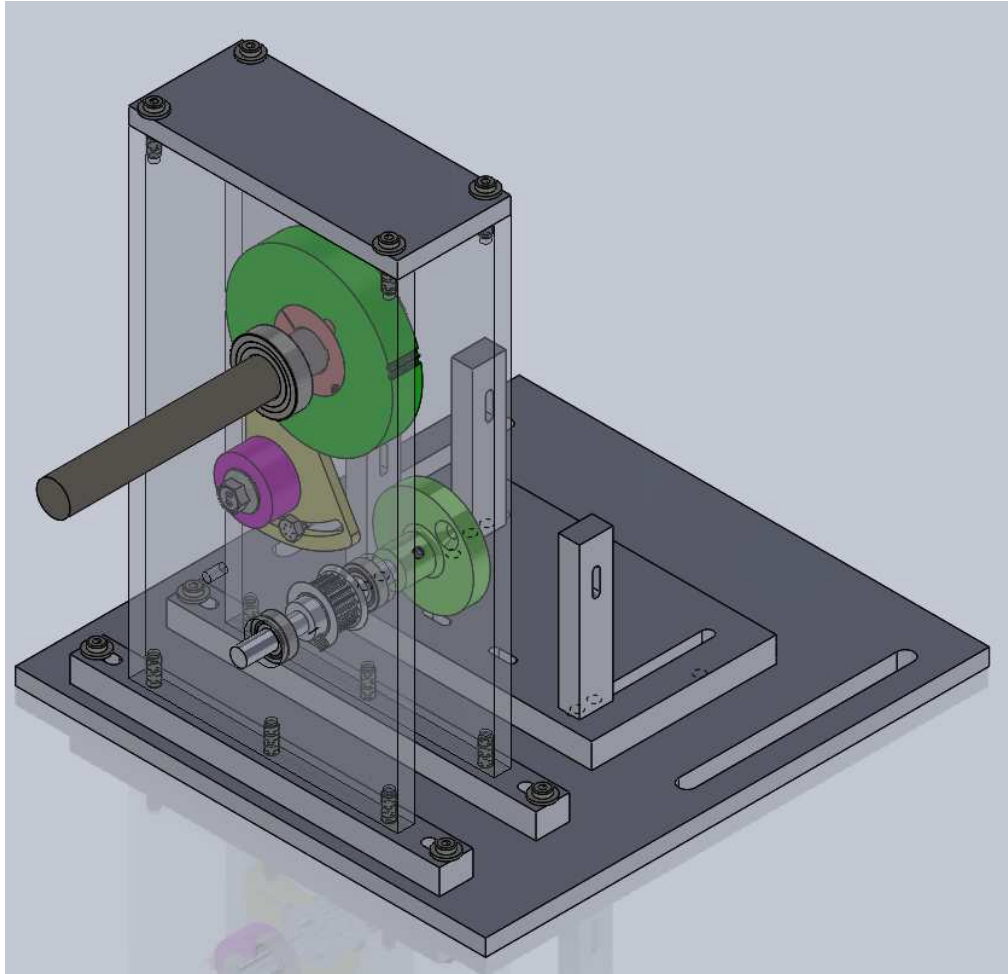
Assembled View of the Dynamometer Fixture (Post CDR)
